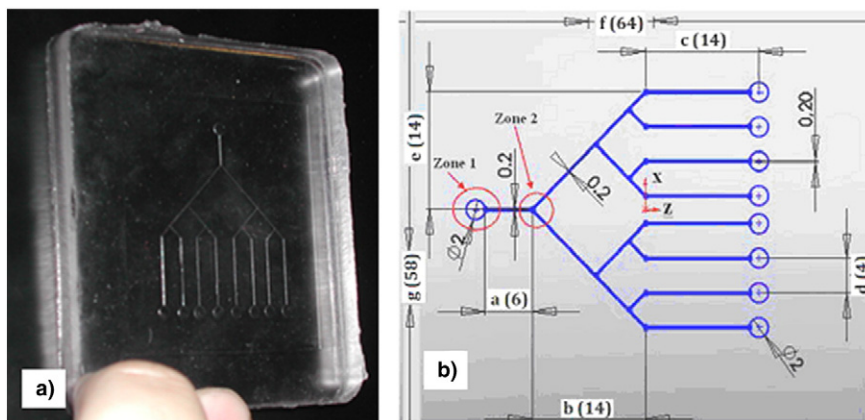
a) Pattern geometry of the elastomeric die cavity mould and b) description of the mould dimensions and micro-fluidic geometries.
